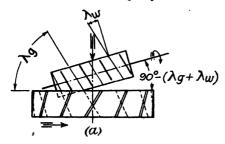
HOBBING A HELICAL OR SPIRAL GEAR
